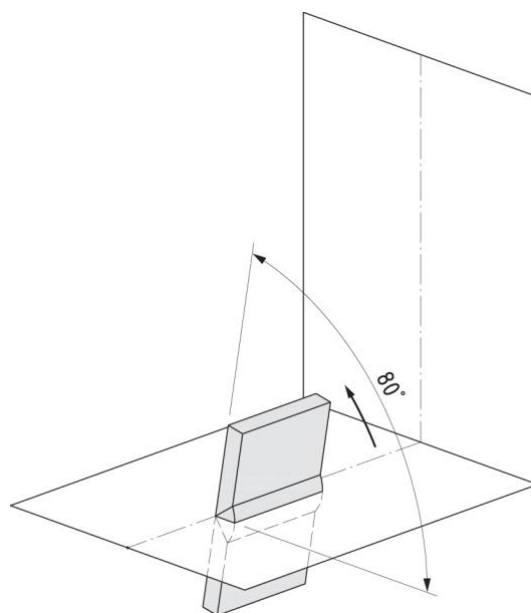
Welding position PC slope and rotation limits for butt welds
